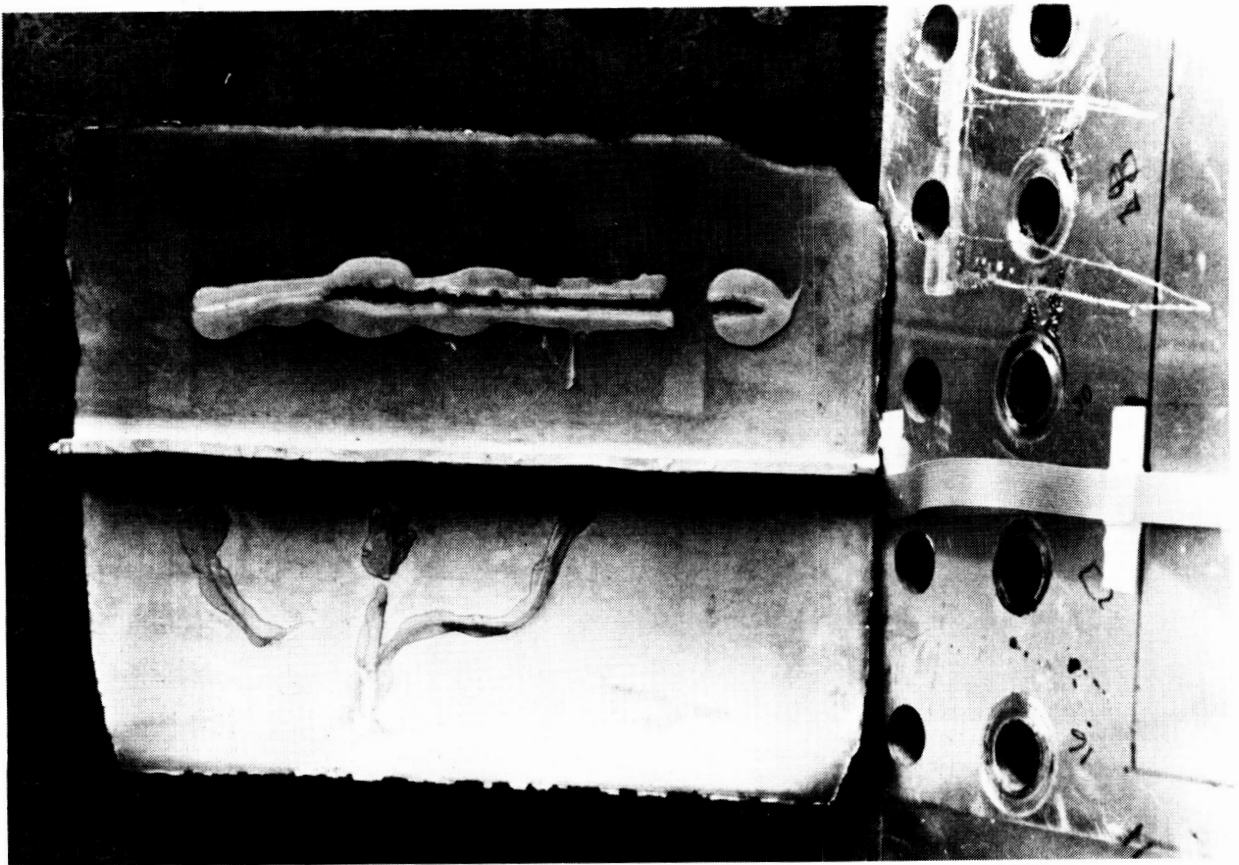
View of Plate Section Showing Anti-Symmetrical Section
